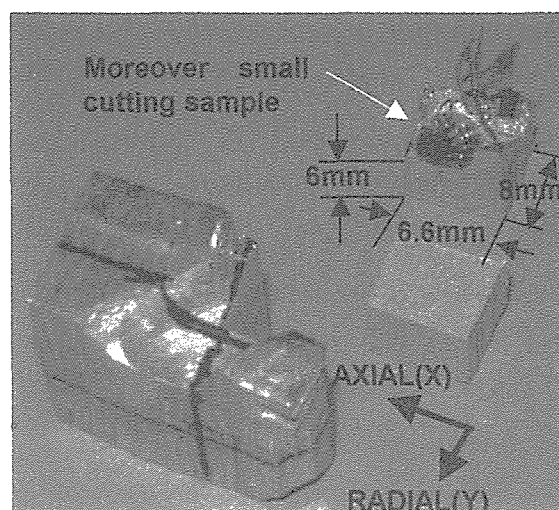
The engine block cut moreover smaller by the electrical discharge machining.
